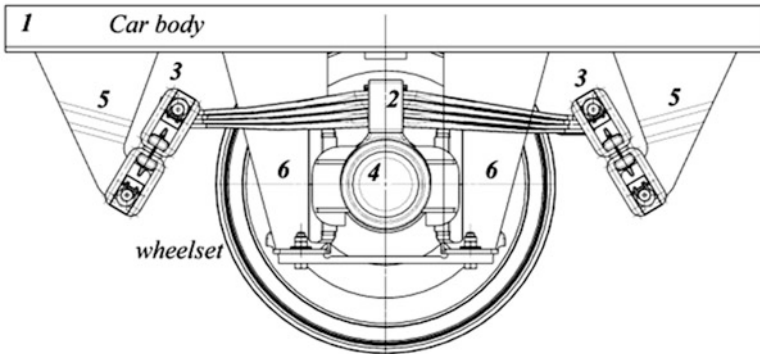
Sketch of wheel set guiding with the UIC double-link suspension
